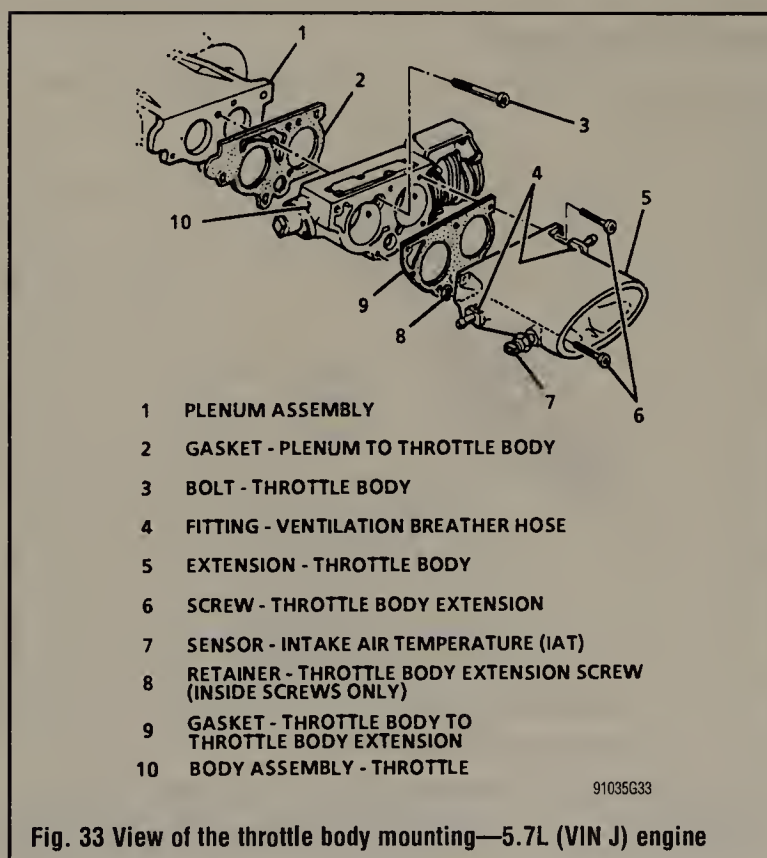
View of the throttle body mounting—5.7L (VIN J) engine
